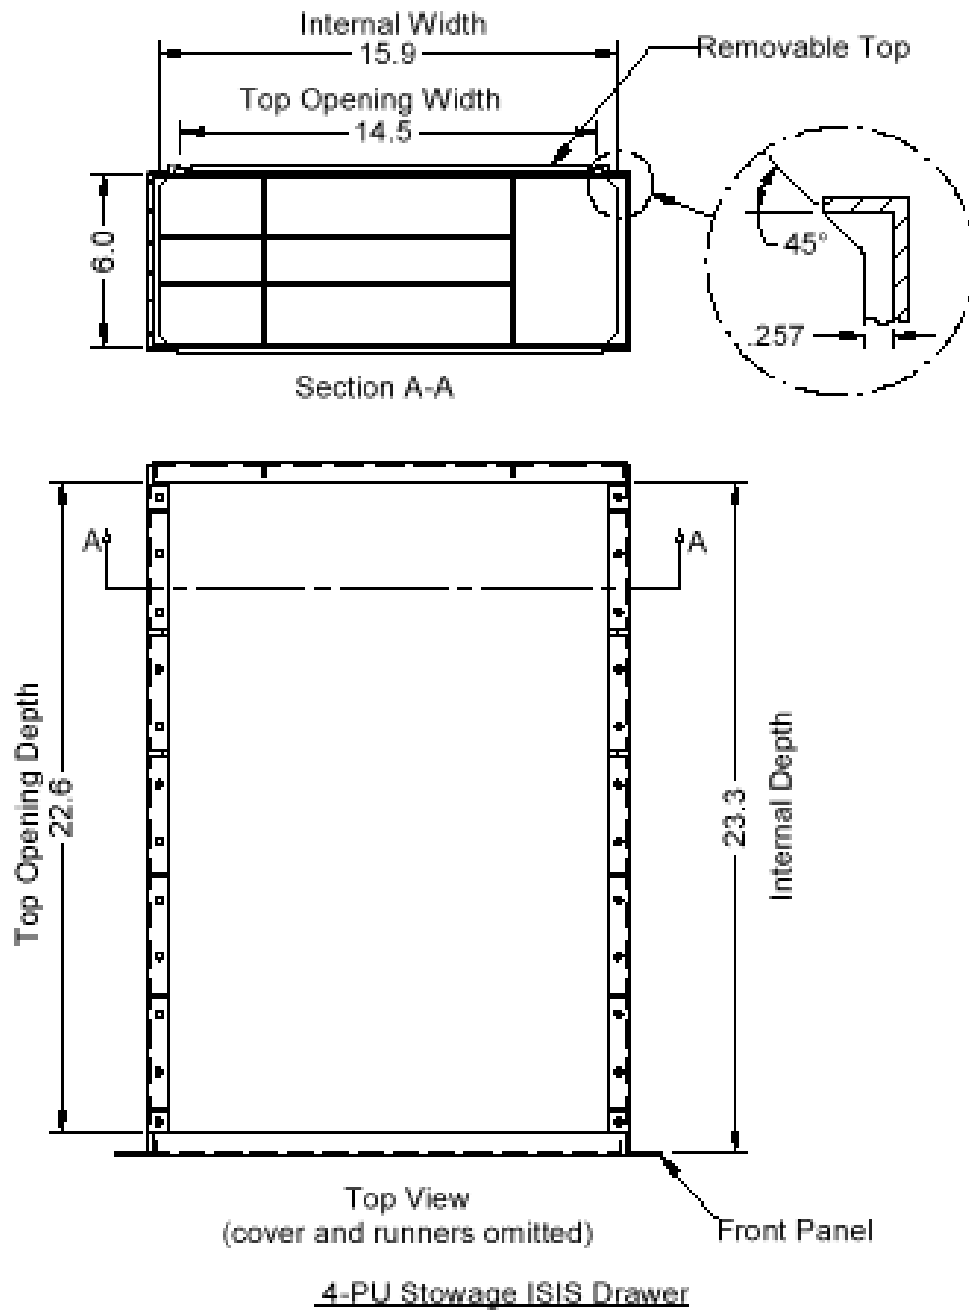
ISIS DRAWER INTERNAL DIMENSIONS (Sheet 2 of 3)
